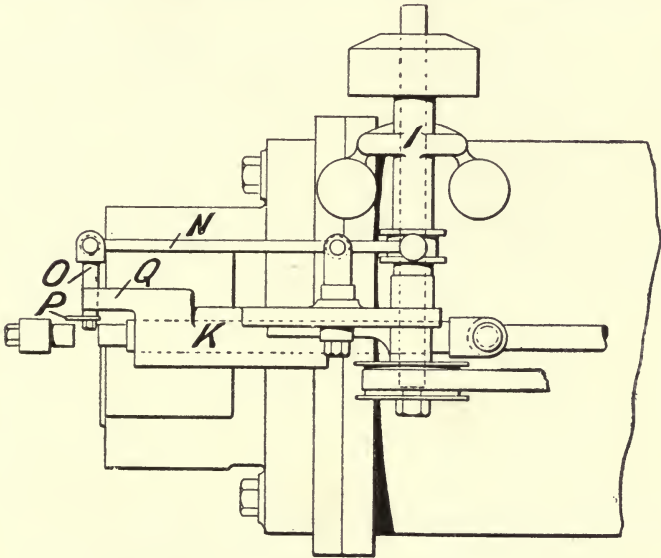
Campbell Oil Engine (side elevation of cylinder end).
